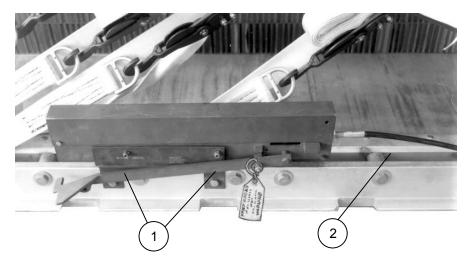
Actuator mounting brackets installed to the type V platform side rail
